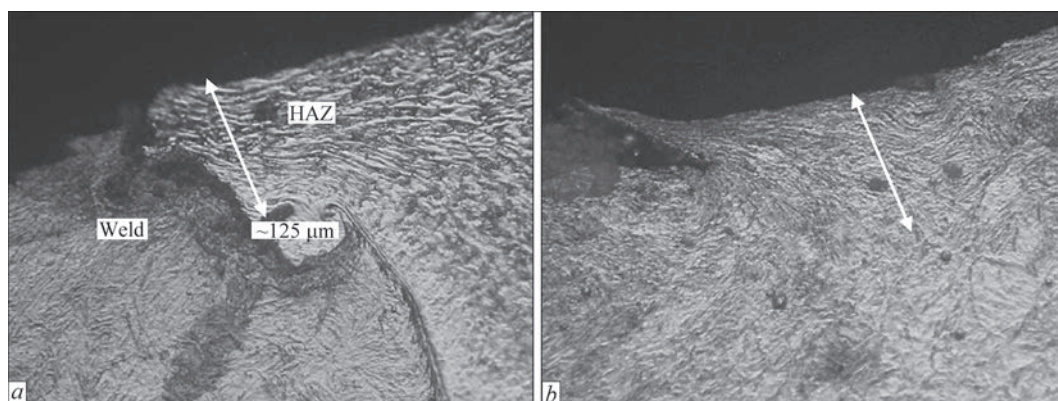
Changes in the weld metal and HAZ structure (*a*) after high-frequency peening along the fusion line of the welded joint and in the base metal (*b*) ($\times 500$)
